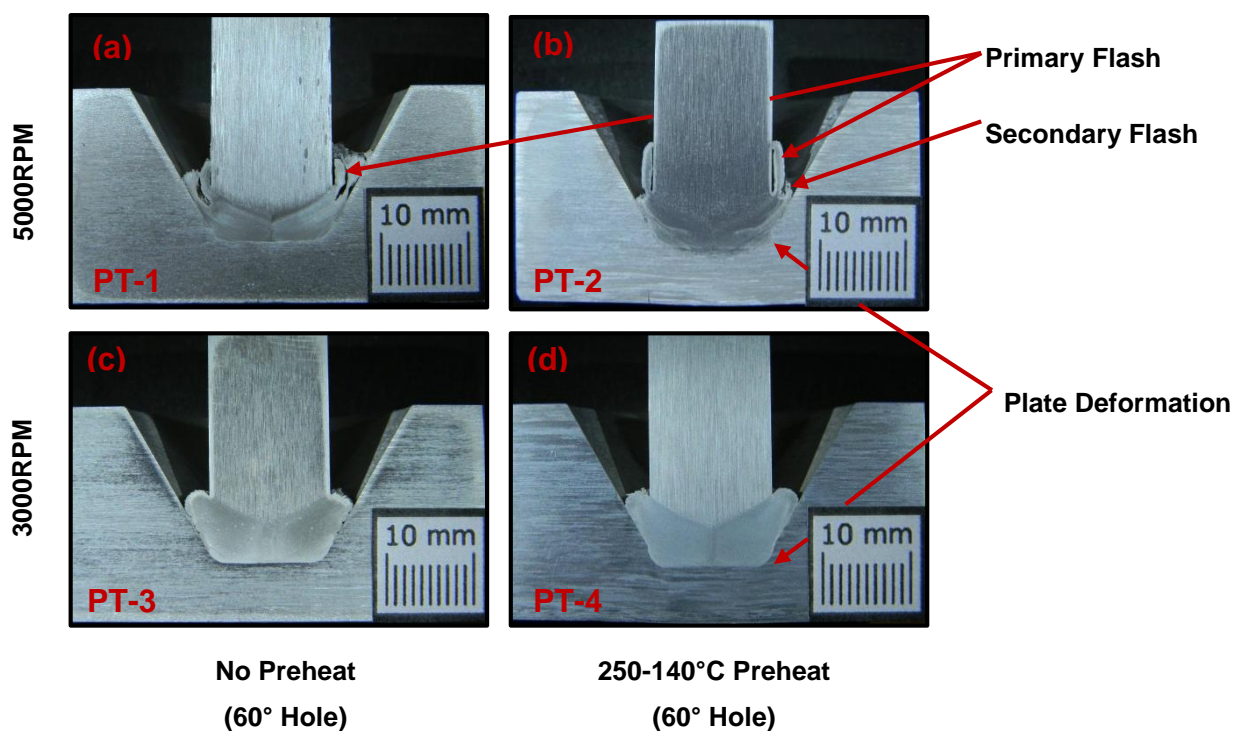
Macrographs of Welds PT-1 to PT-4
